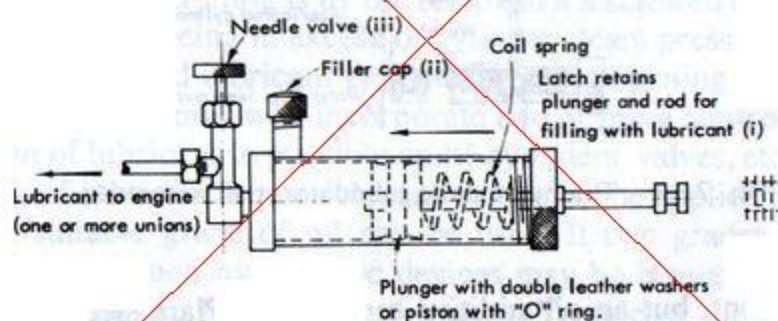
Simple pressure lubrication for the bearings and external parts
